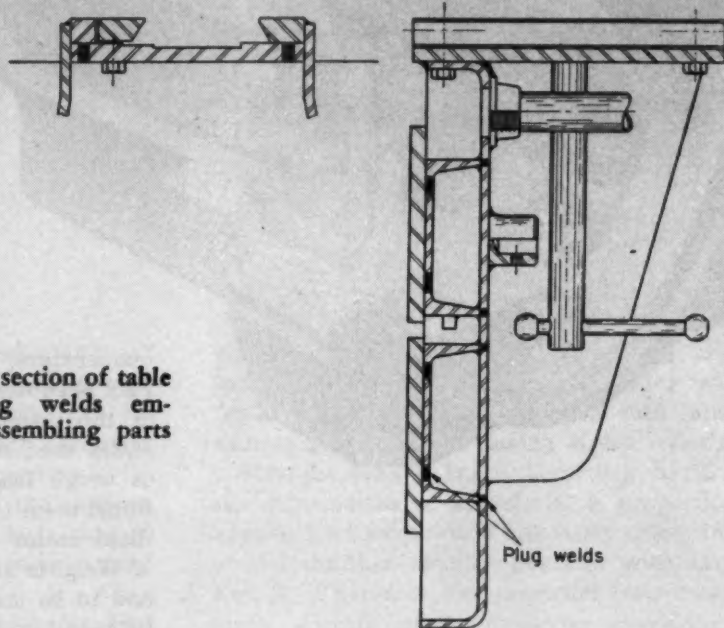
Cross section of table showing plug welds employed for assembling parts
